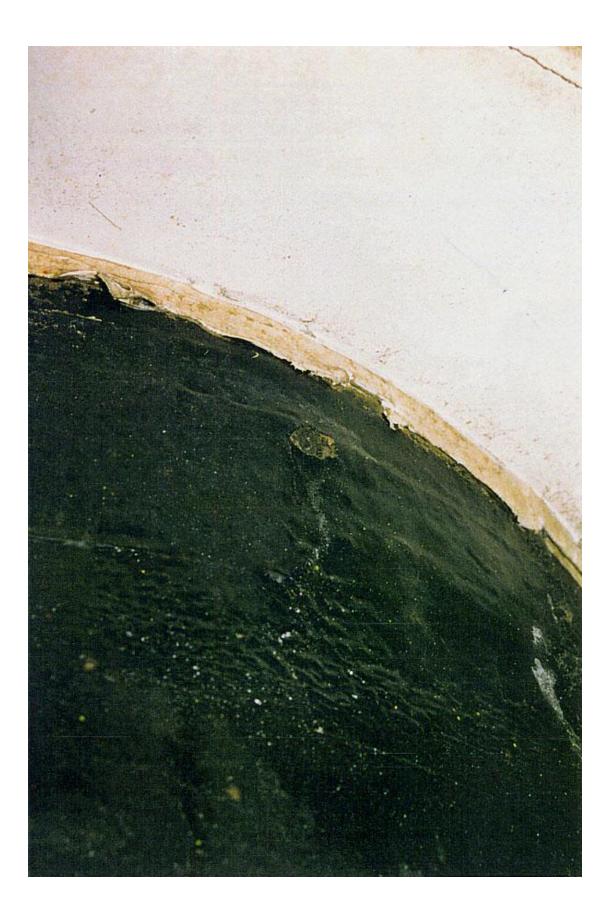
Crack, in resin-rich surface layer. (B) Close-up view showing crack depth to surface resin layer thickness (white particles are snow)
